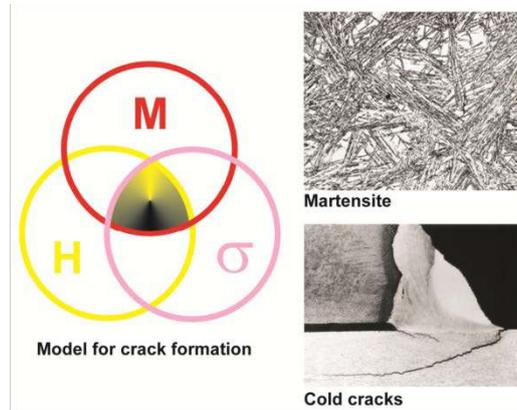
Model for crack formation in both the HAZ and weld metal
